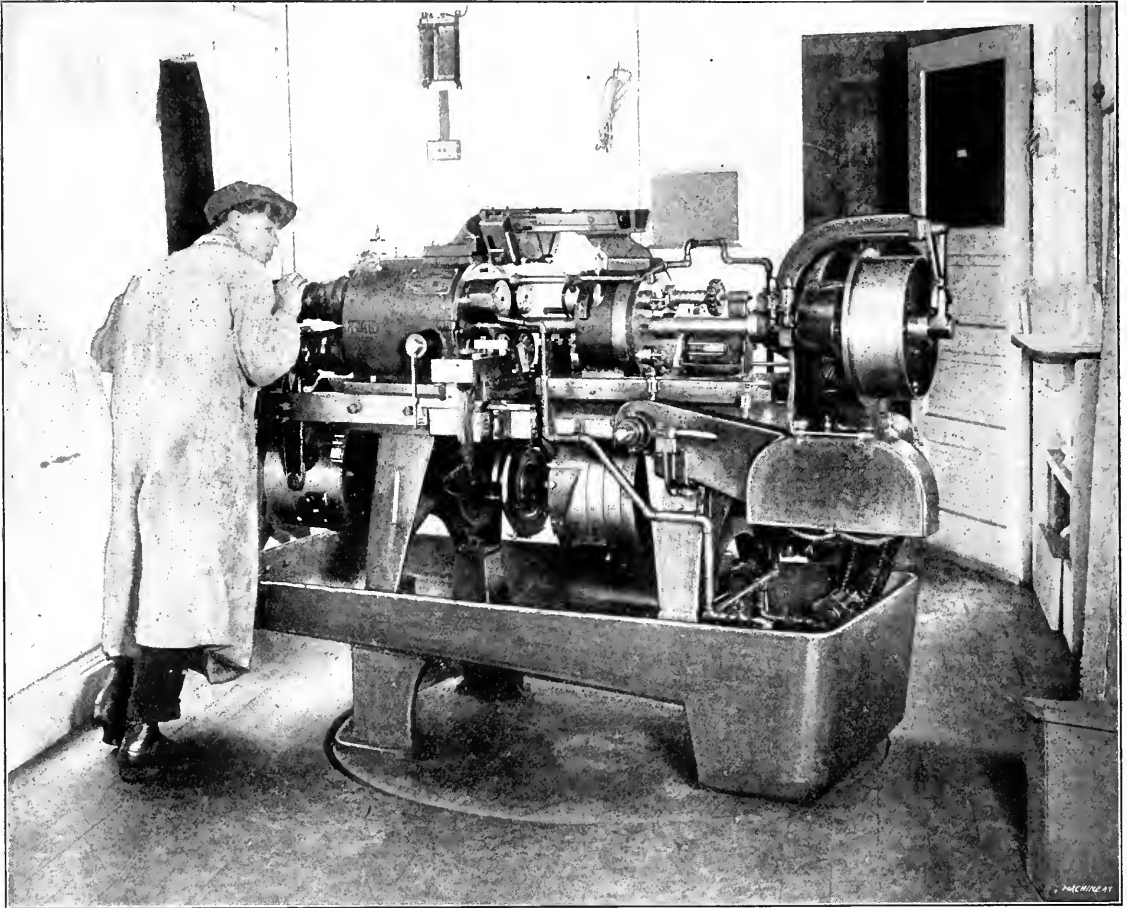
Acme Screw Machine being posed on Turntable for photographing
